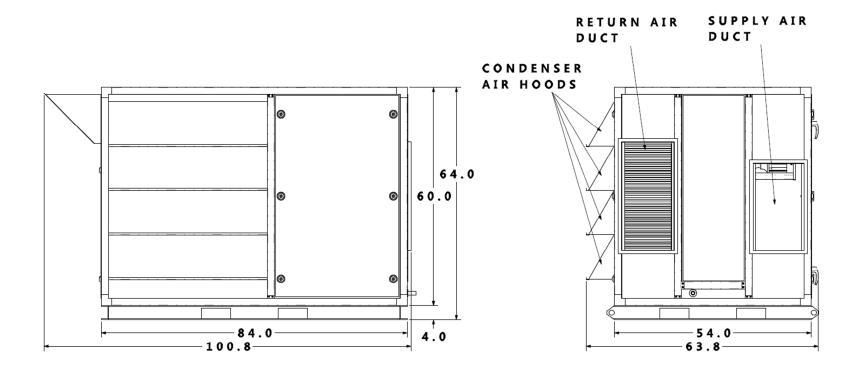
(continued) – Engineering Drawing of the LDDX-Ad Prototype
